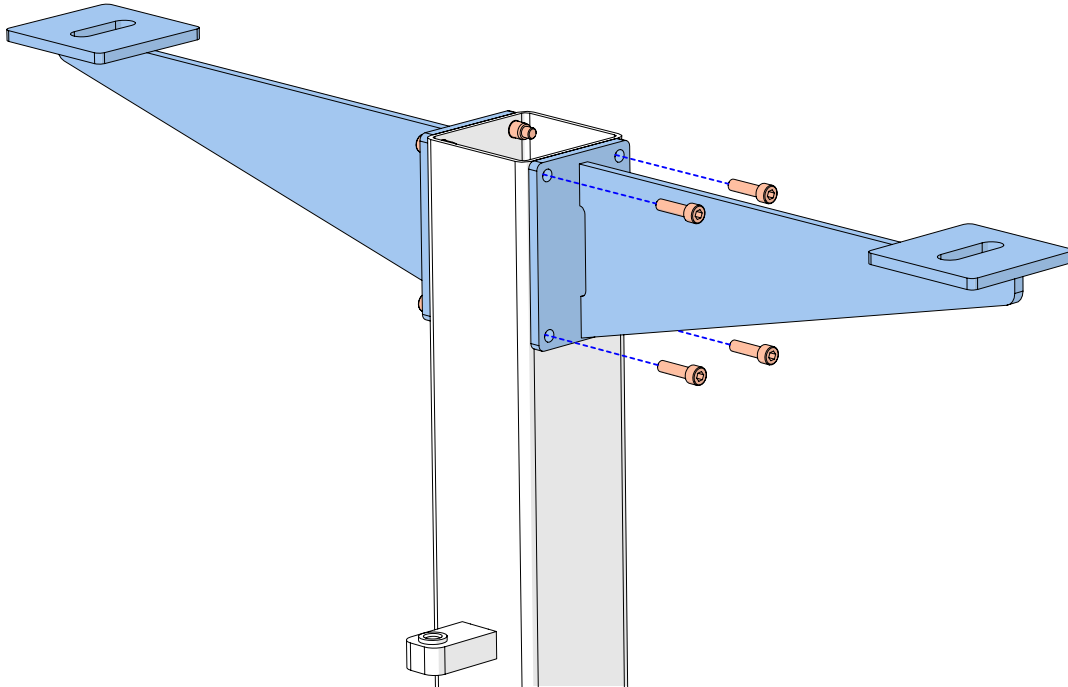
Installing the Uprights Connection Gussets - Head Unit
